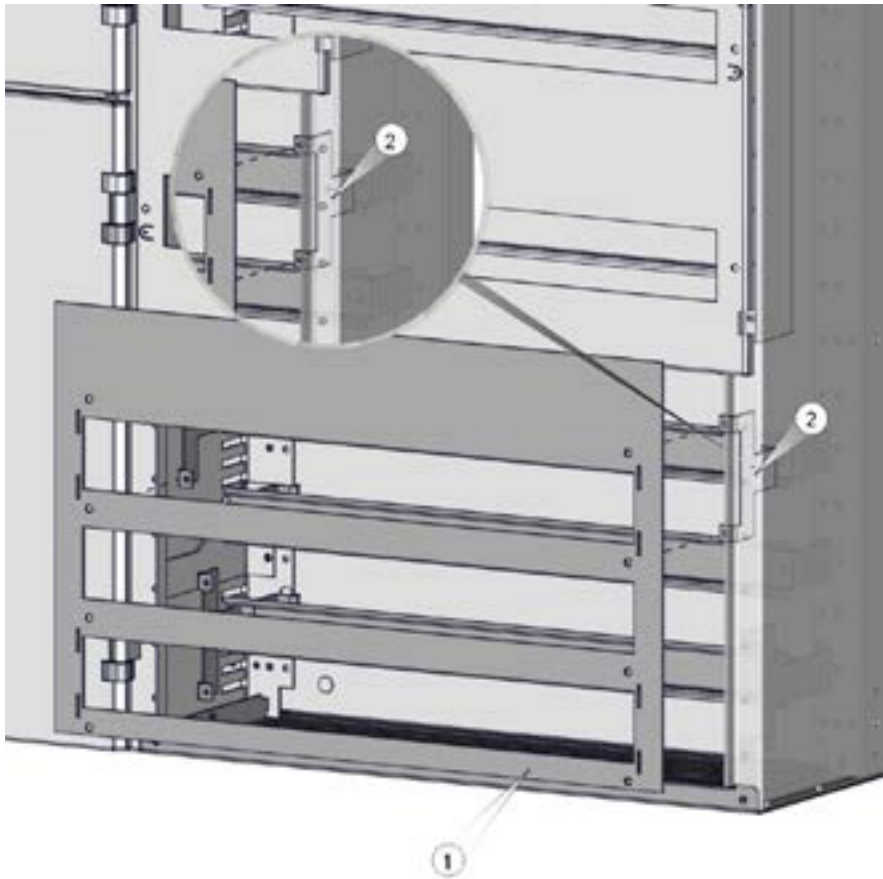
a) Spacers are fastened to L profiles, and DIN rails to spacers.
